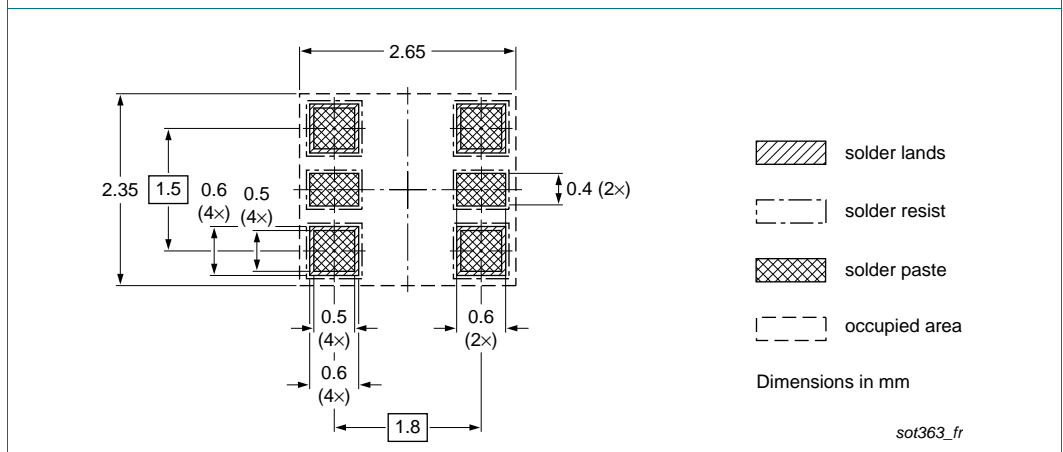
Reflow soldering footprint BAS16VY (SOT363/SC-88)
